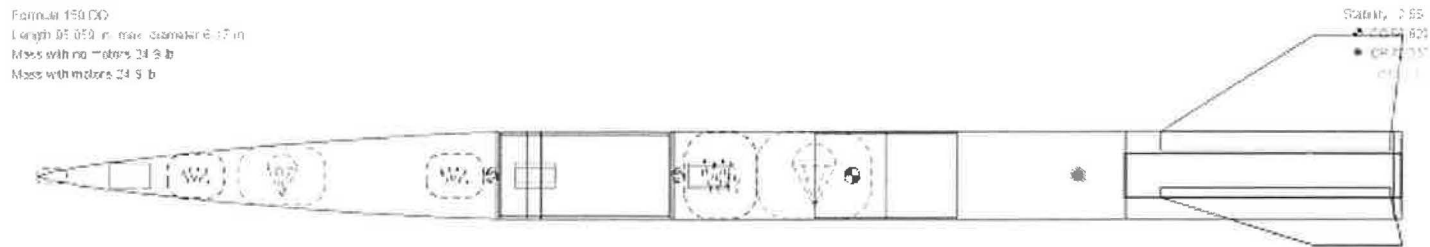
Scale drawing (1:10) of rocket without motor installed.
